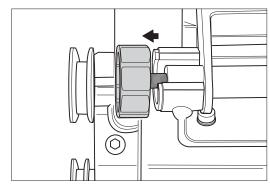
until the two nuts used to fit into the motor bearing bracket are exposed.
